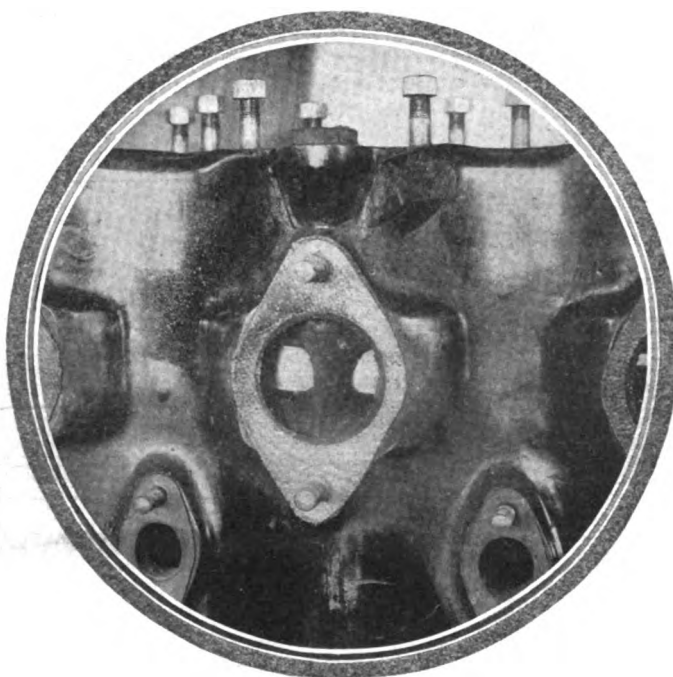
Exhaust side of Stoddard-Dayton-Knight motor, showing central web in the passage-way forming a support for connecting piece in sleeve
